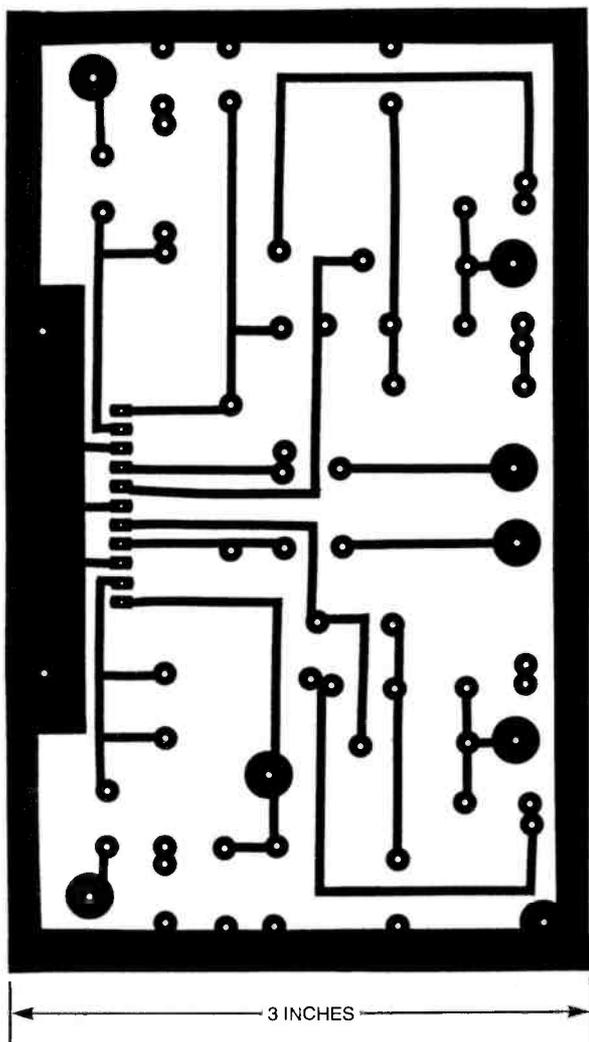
The Portable CD Amp was assembled on a printed-circuit board, measuring 3 by $5\frac{1}{16}$ inches. A template of the author's printed-circuit layout is shown here full-size.
